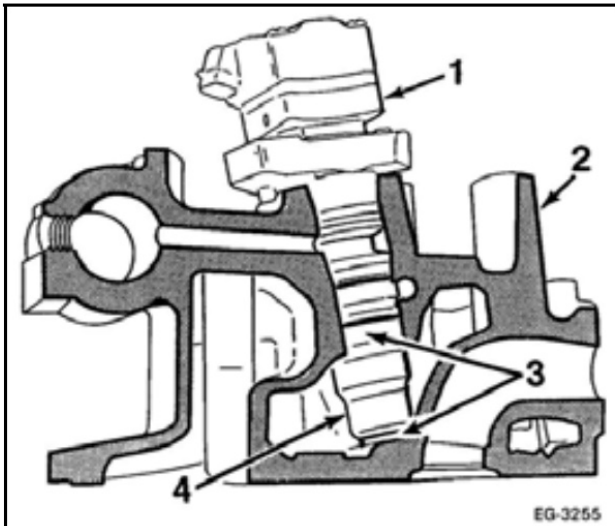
Fuel Injector Sleeve Installed in Cylinder Head
